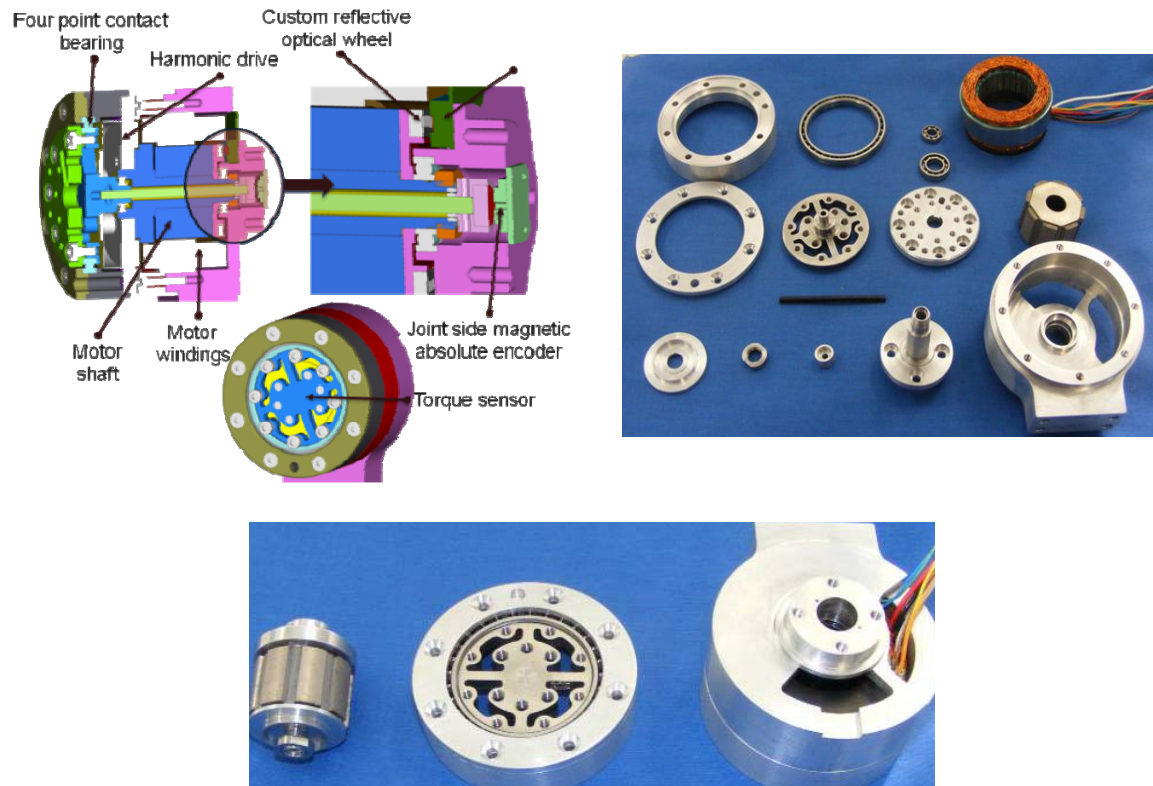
Section of the 3D mechanical assembly and mechanical parts of the updated motor/gearbox group.
